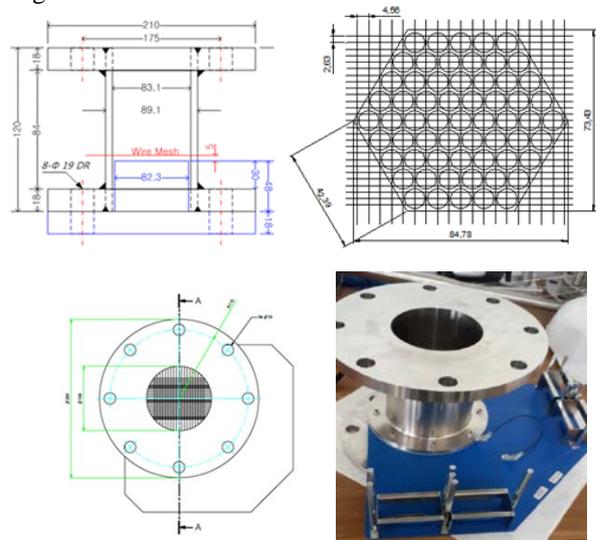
Design of wire mesh sensor of 61pin wire mesh sensor
